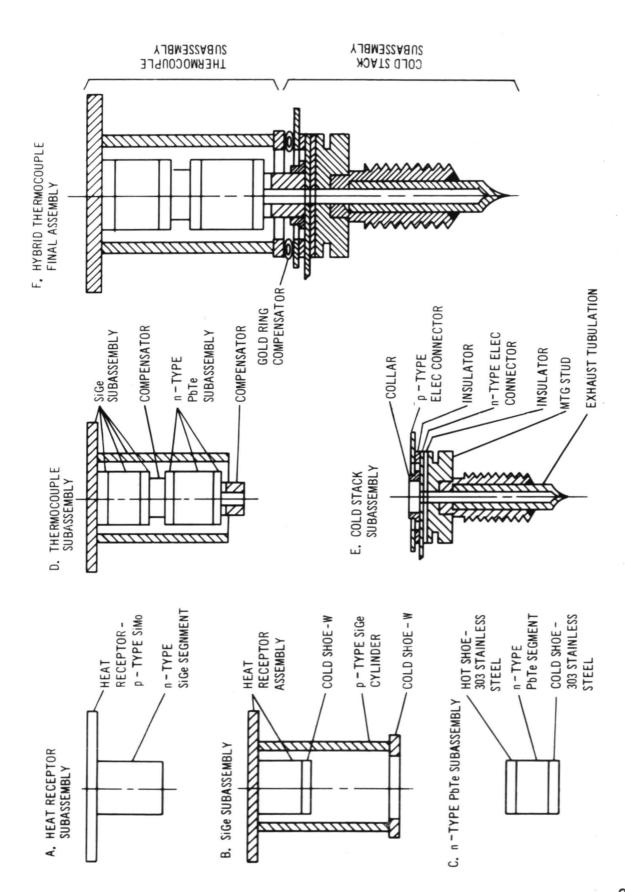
Hybrid Thermo couple Assembly Sequence - B
